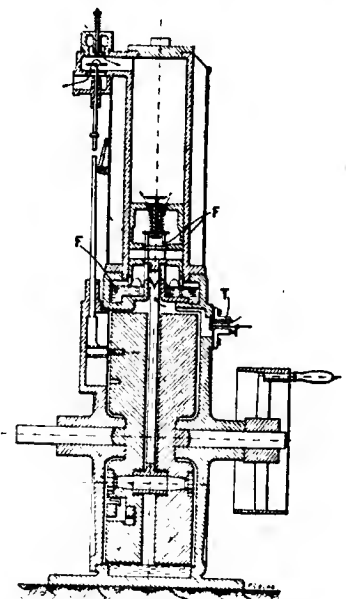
Inclosed flywheel type with valve in piston, patented in 1885.
